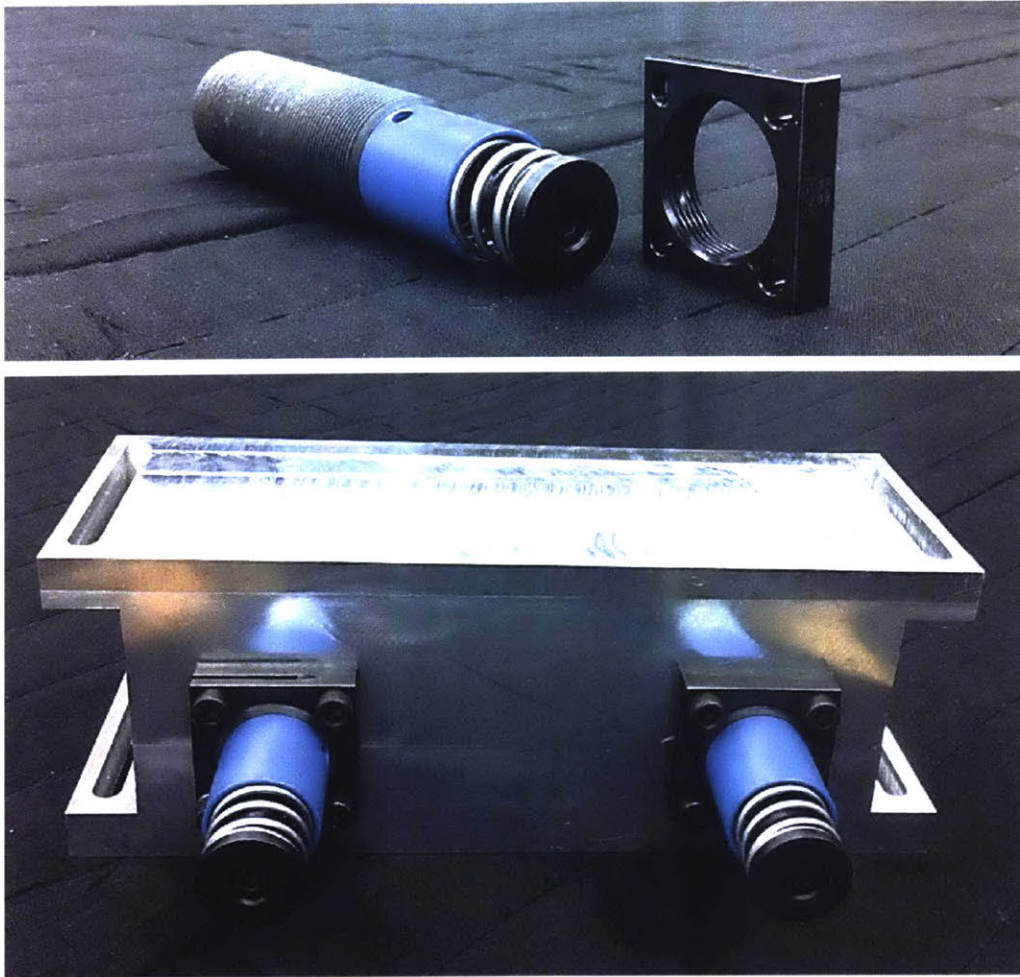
Shock absorbers (SCS33-25 by ACE) installed on a spacer to provide enough damping to stop the stage in case of motor or control failure.
